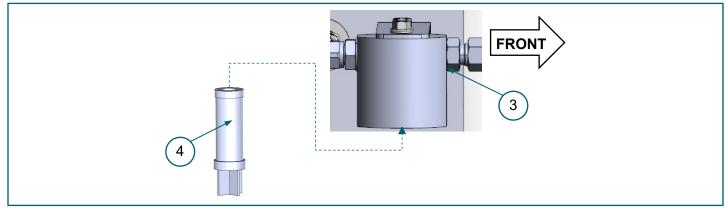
(3) HP fuel filter head, (4) filter element
